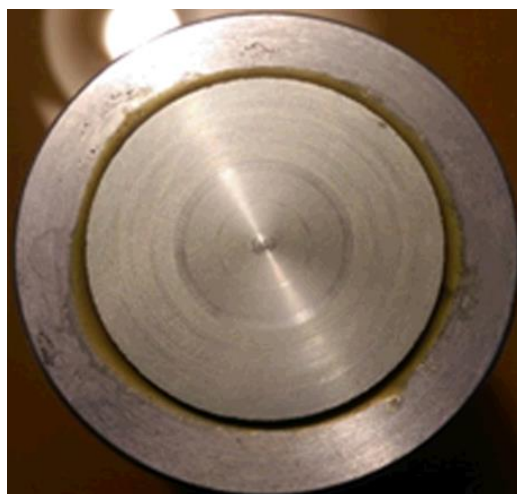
Sample of machined germanium and embedded in the relevant fixture
